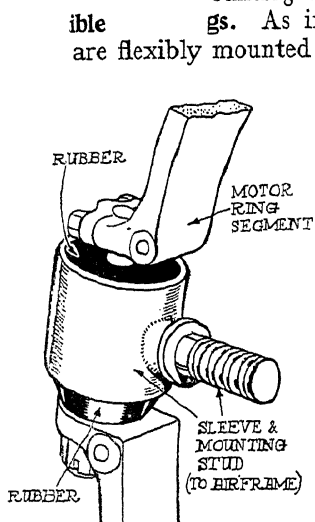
Detail of one of the Bristol flexible engine mounting members.
